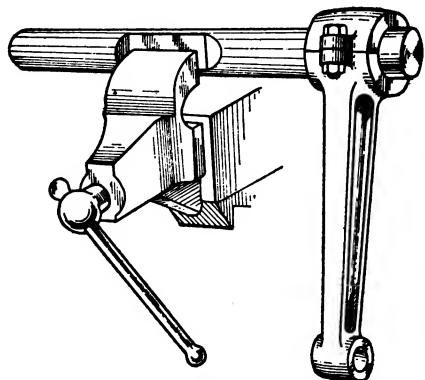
Standard Mandrel Method of Lapping Big-End Bearings of Connecting Rods
